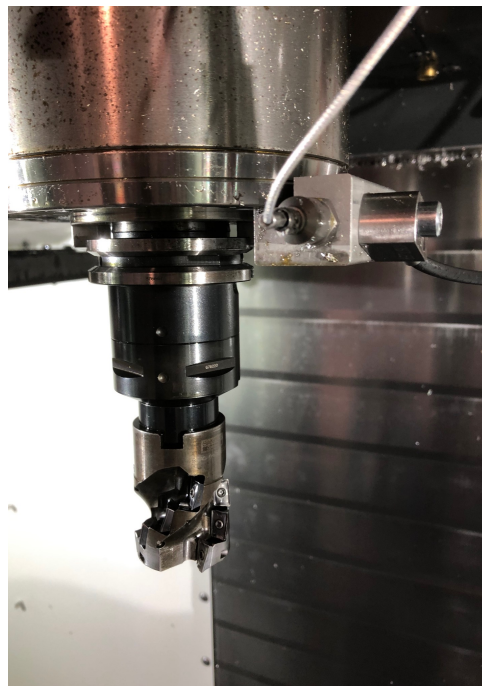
Machine spindle with accelerometer and ultrasonic acoustic emission sensor installed.
